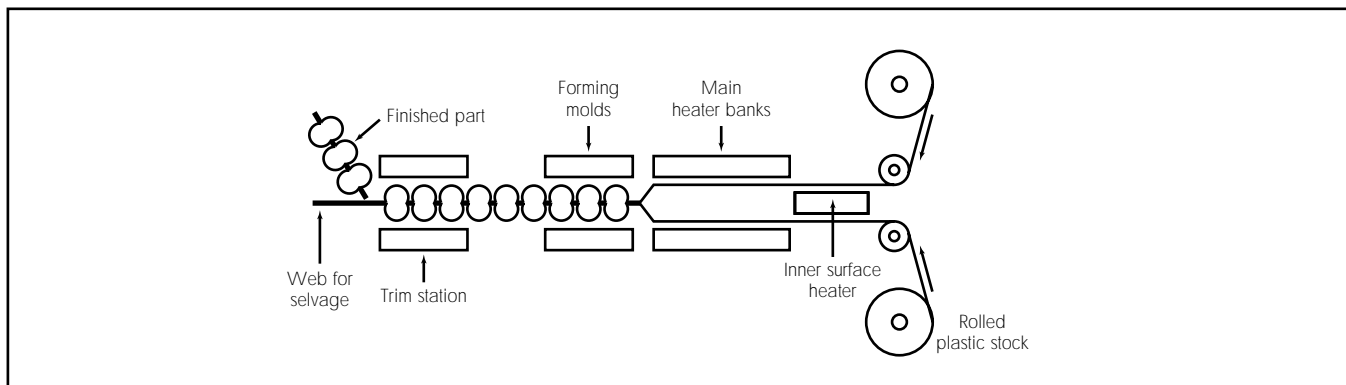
Twin-sheet forming on continuous roll-fed machinery.
